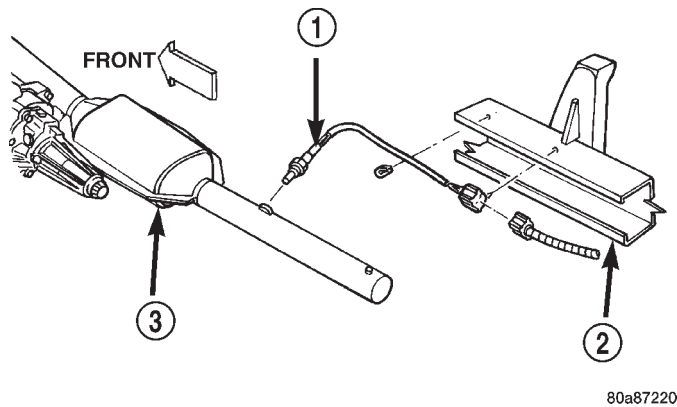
Downstream Oxygen Sensor—2.5L Engine
